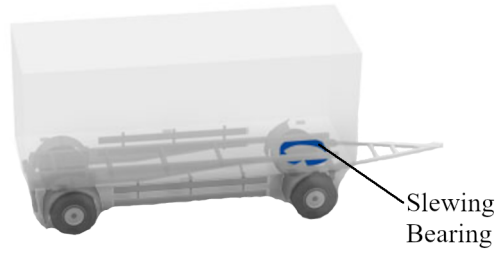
Slewing Bearing Intended Usage<sup>4</sup>
